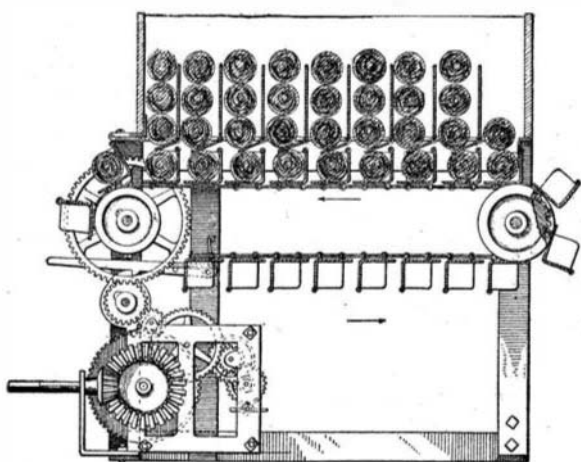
MECHANISM OF THE CIGAR-VENDING MACHINE.
